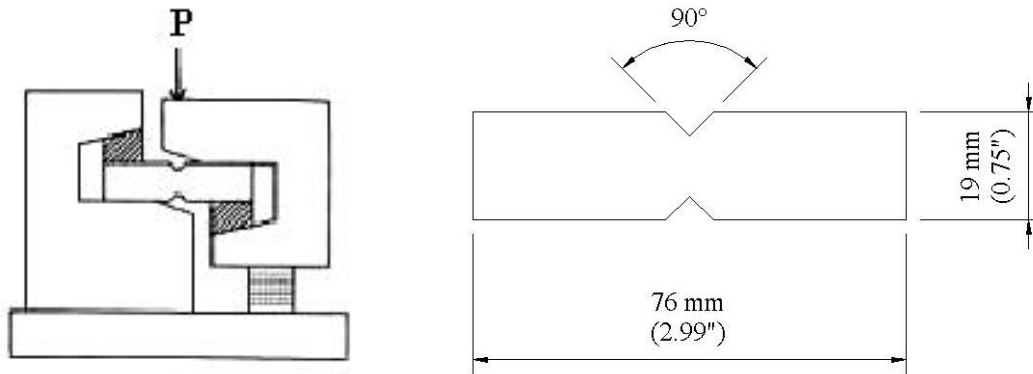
IOSIPESCU (V-NOTCHED) SHEAR TEST FIXTURE AND SPECIMEN
